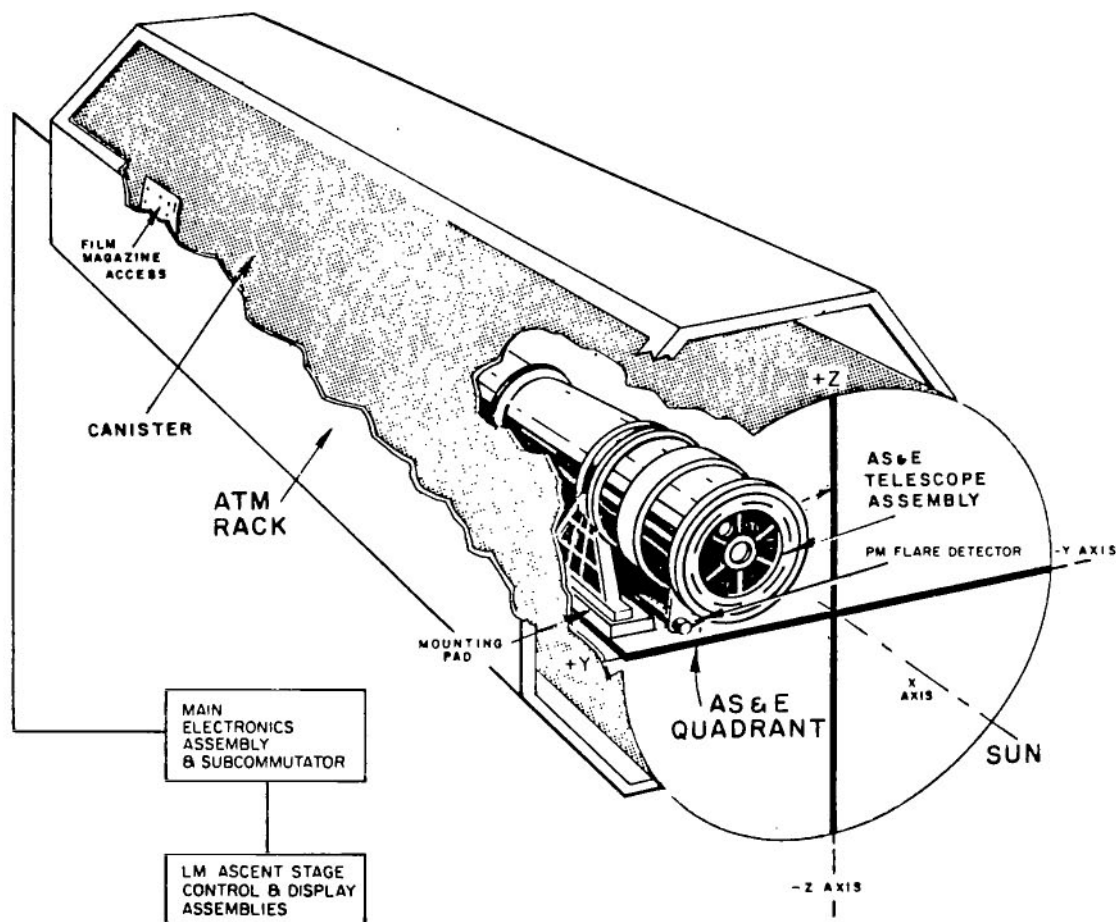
S 054 MECHANICAL ASSEMBLY
